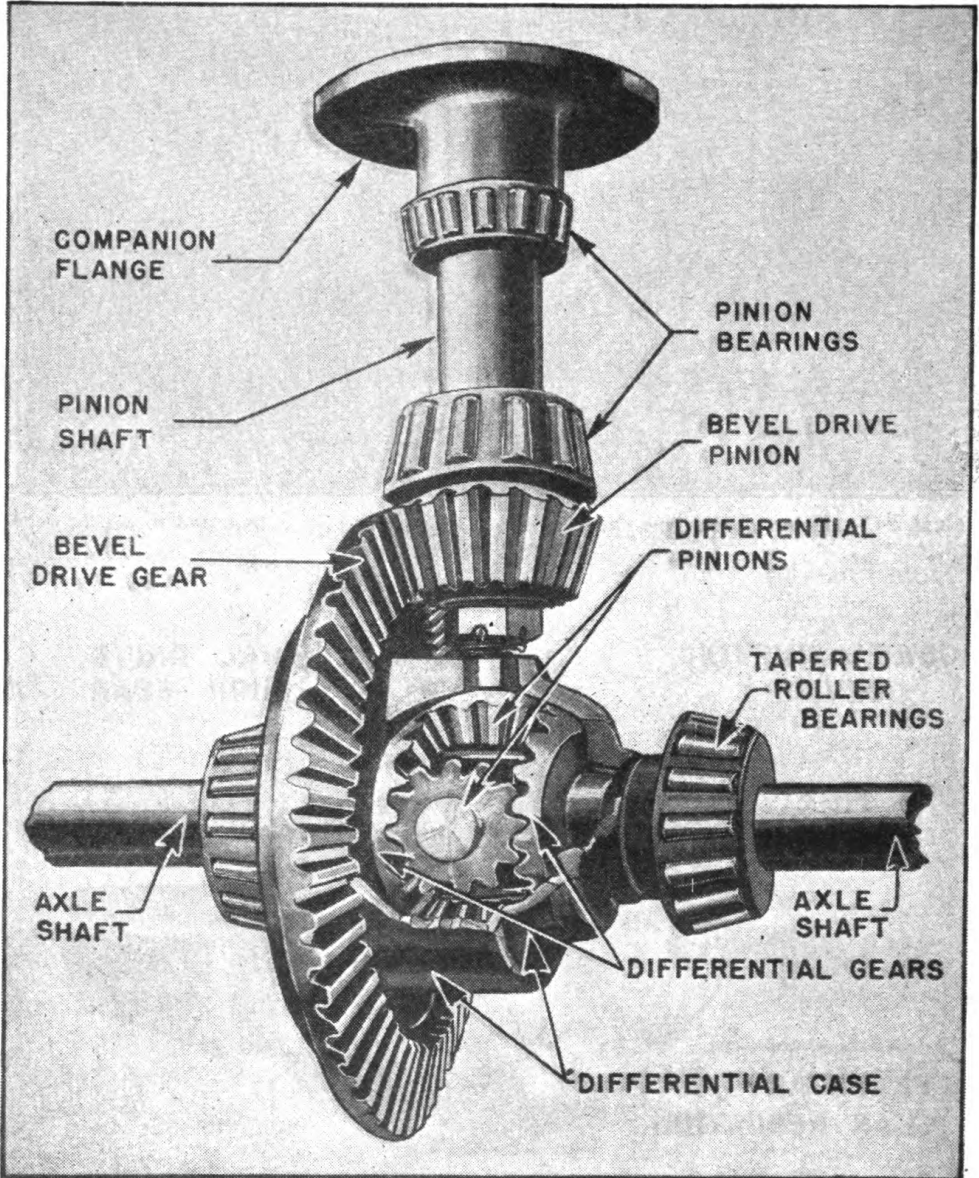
Bevel gear and pinion type of final (axle) drive assembled to differential unit.
